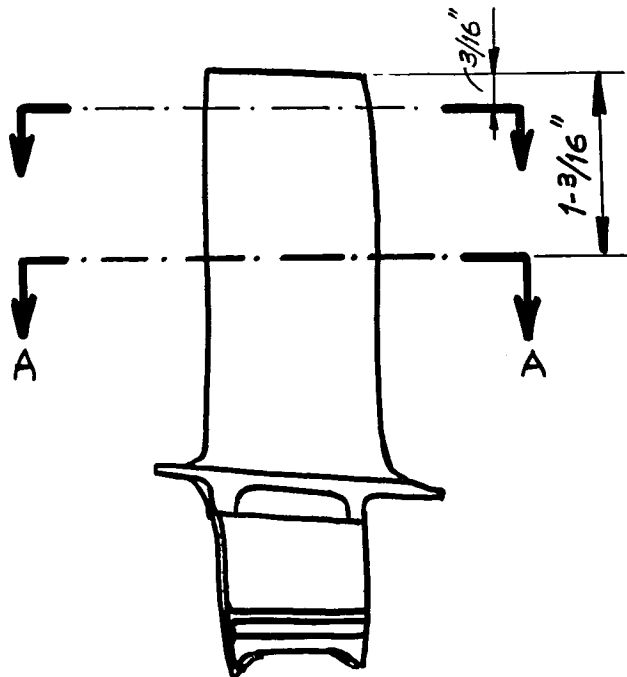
Initial Measurement Locations on JT9D First Stage Blade Airfoil Section.
